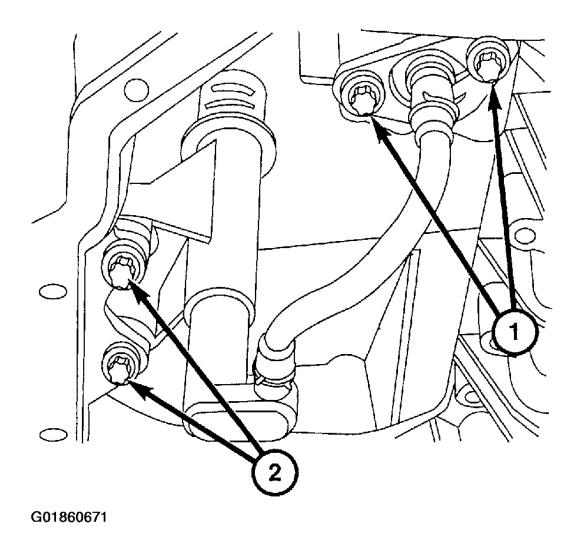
Removing Oil Level/Temperature Sensor & Screws Courtesy of DAIMLERCHRYSLER CORP.
